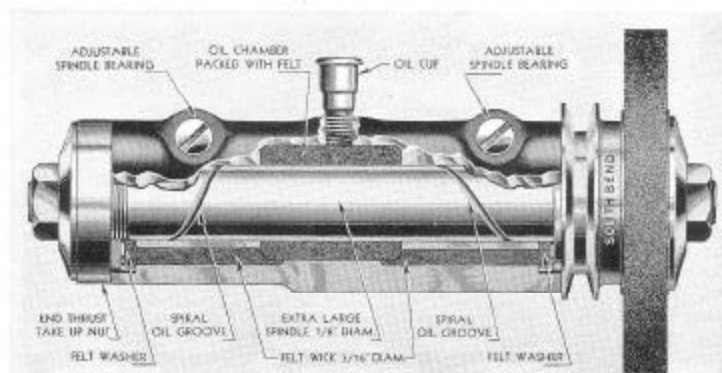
Cross Section of Spindle of Valve Grinder Showing Construction of Bearings, End Adjustment, Bearing Take-up and Felt Wick Oiling System.
